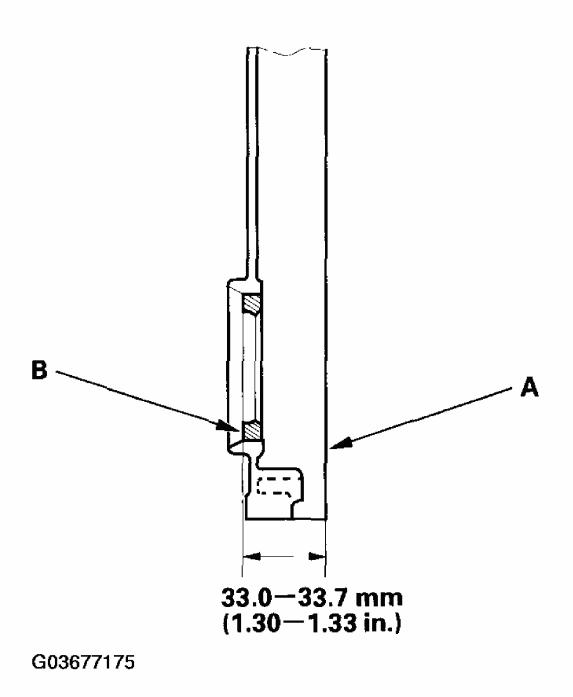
Identifying Distance Between Chain Case Surface And Oil Seal Courtesy of AMERICAN HONDA MOTOR CO., INC.
